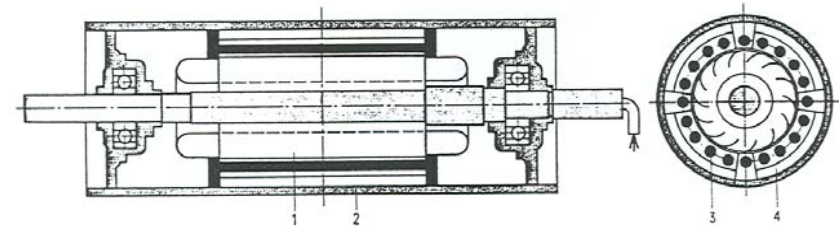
Cross section of outer rotor 4-pole PM synchronous motor with ferrite surface mounted magnets and squirrel cage: 1: inner stator AC three-phase winding, 2: outer rotor iron back, 3: squirrel cage, 4: ferrite magnets (Siemens AG)
